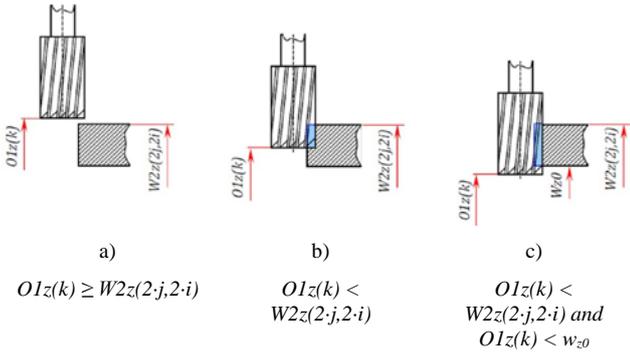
Checking for contact in intersection point of tool circumference and workpiece for different tool positions relative to workpiece in z direction
